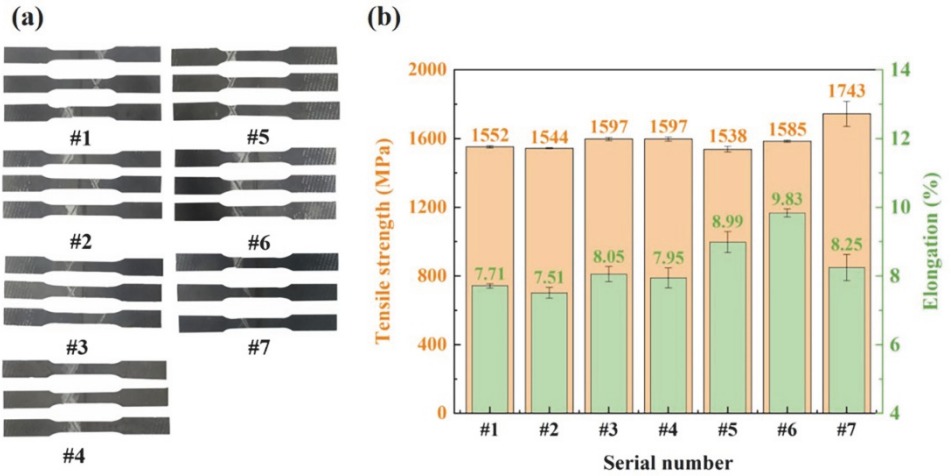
(a) The appearances of the ruptured specimens (b) Tensile test results of seven different Al-Si coated PHSs laser welded joints.
